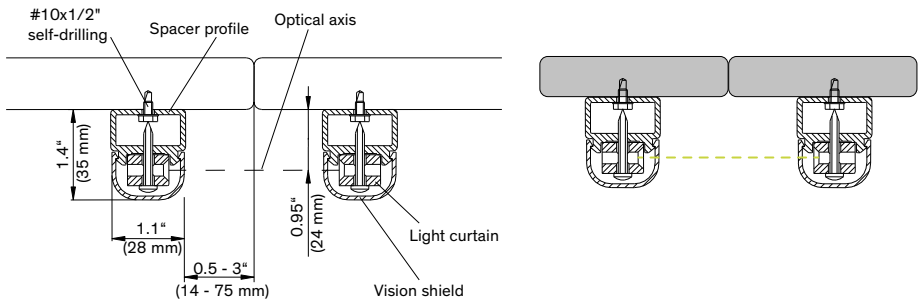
Mounting details for center opening doors using two (2) spacer profiles
